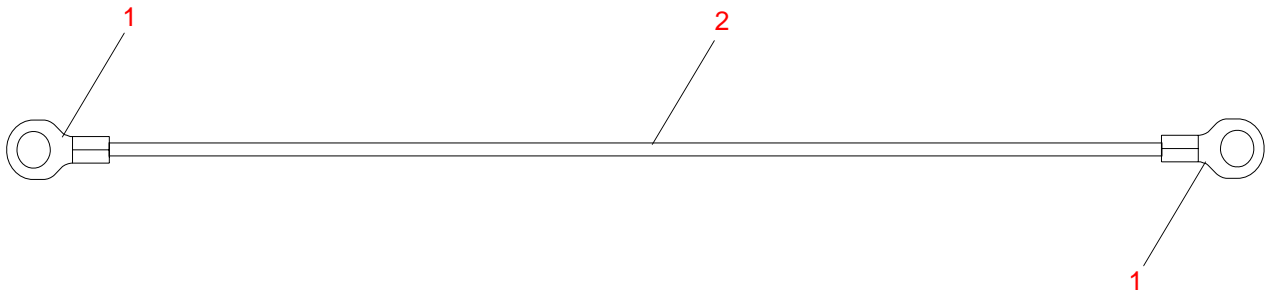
Yoke Lamp Cable Assembly (VL500/VL500D)
